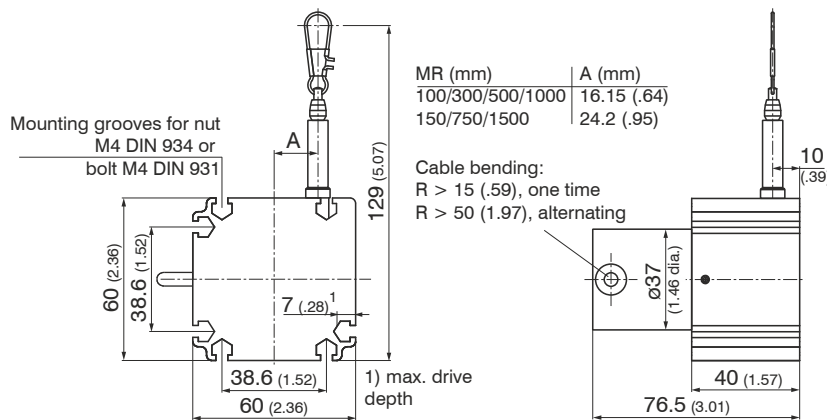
Dimensional drawing ... - FD60 - CR - P, dimensions in mm (inches), not to scale
